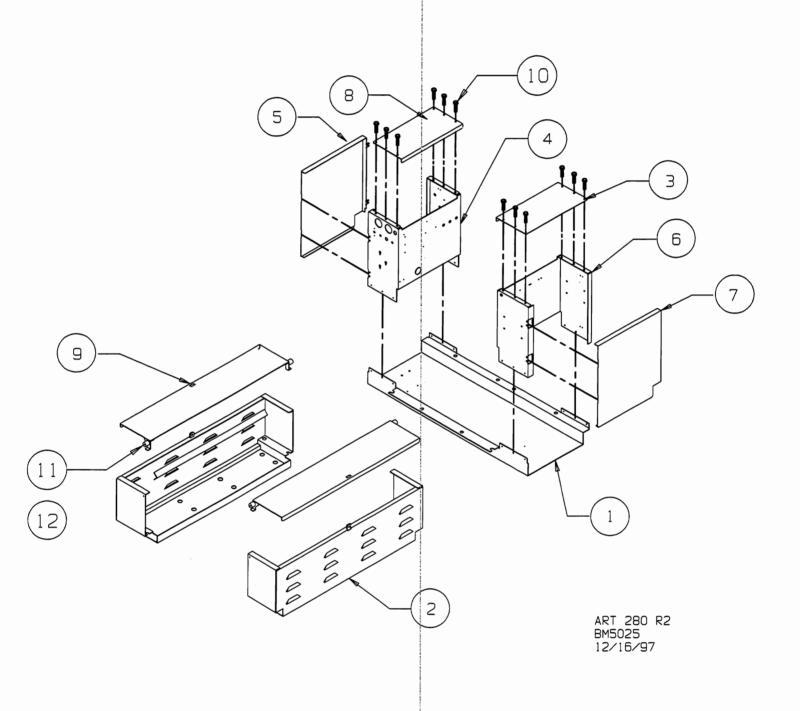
48"/58" Cabinet & Battery Box Assembly
